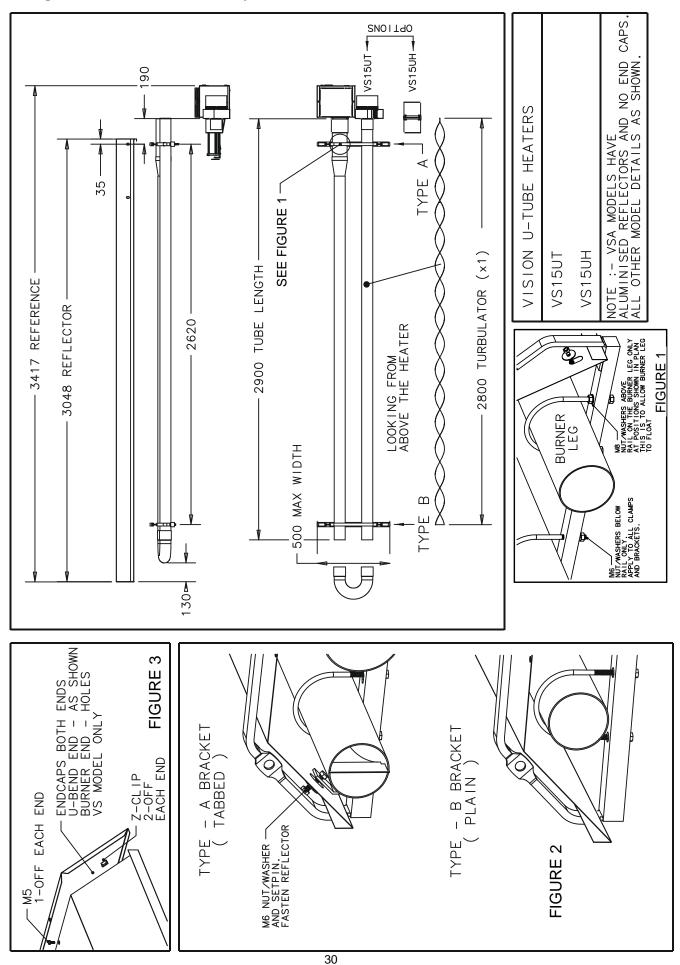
Vision Heater Assembly: Models VS/VSA U tube 20kW.
